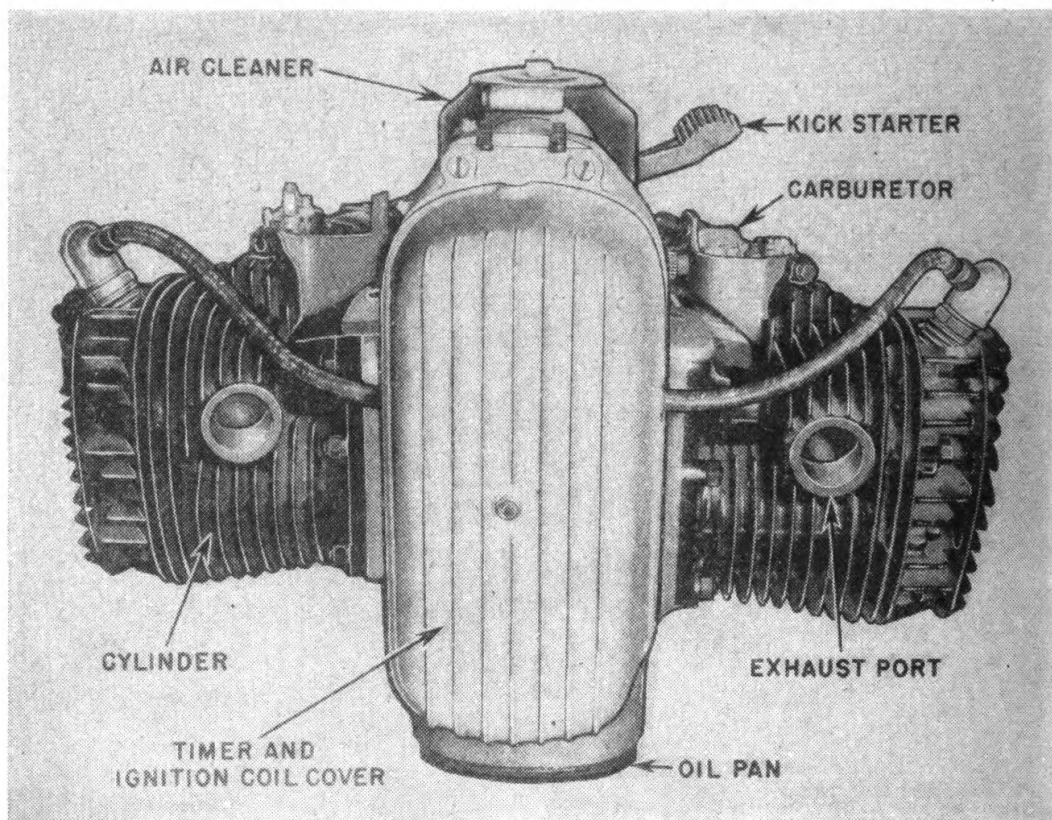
180° horizontally opposed Harley-Davidson engine.
